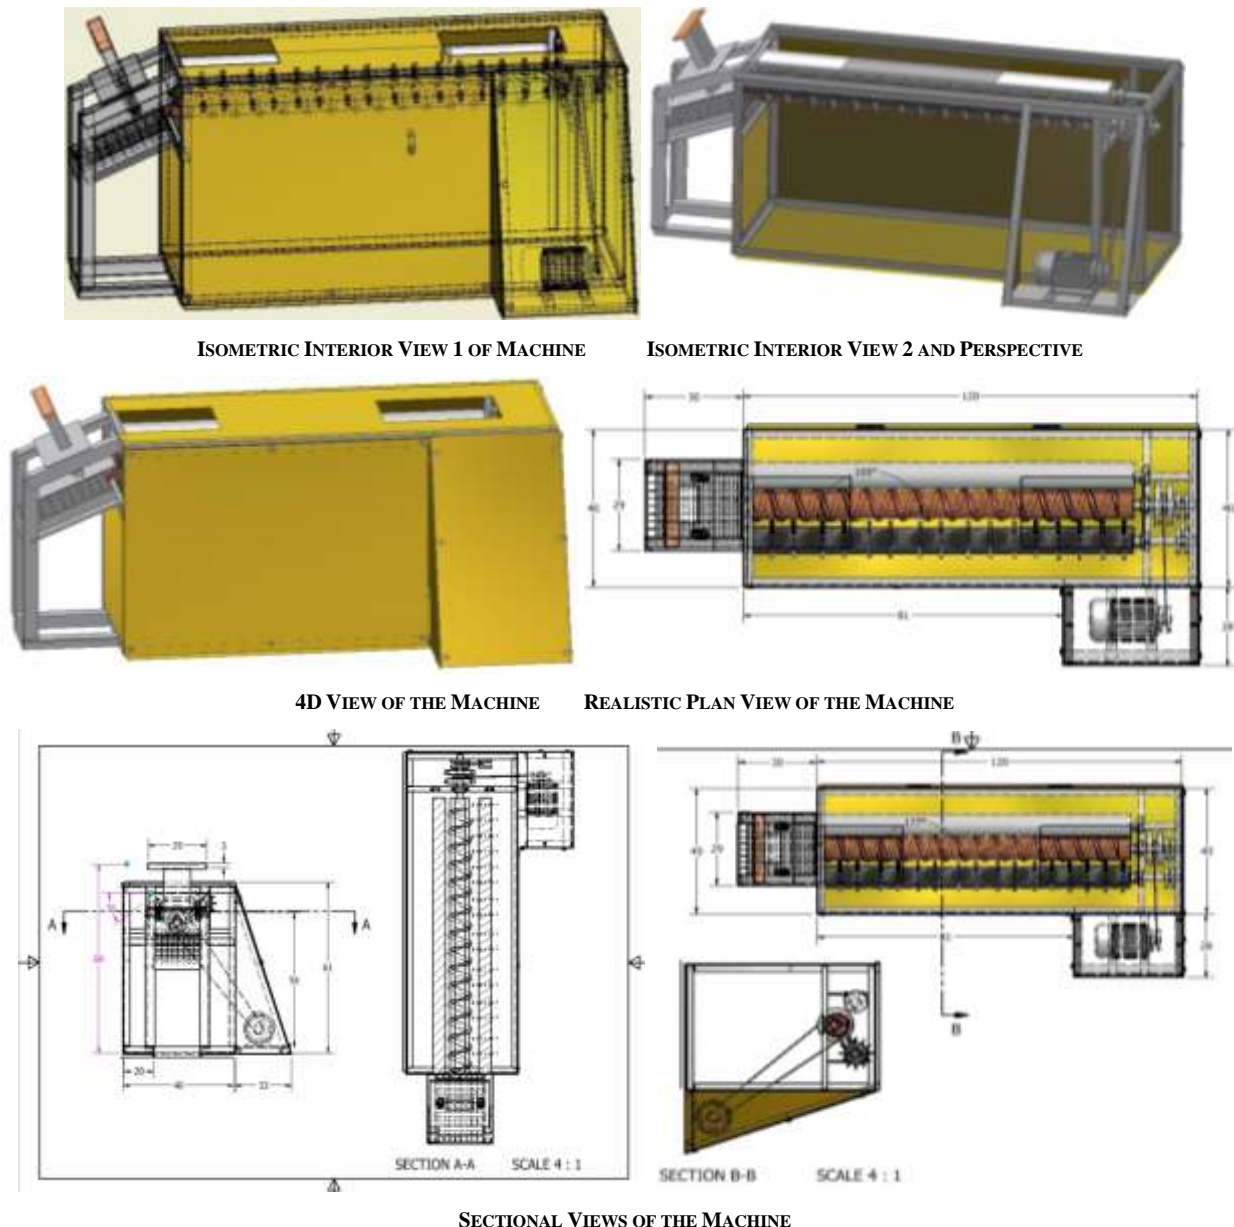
Showing Detail Drawing Of The Yam Peeling And Slicing Machine.
